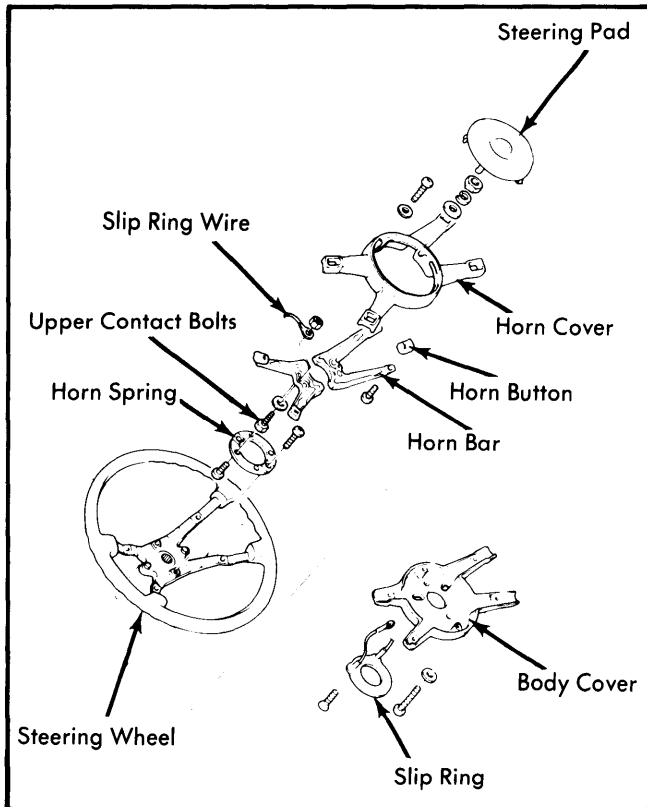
Exploded View of Accord Steering Wheel and Related Components
